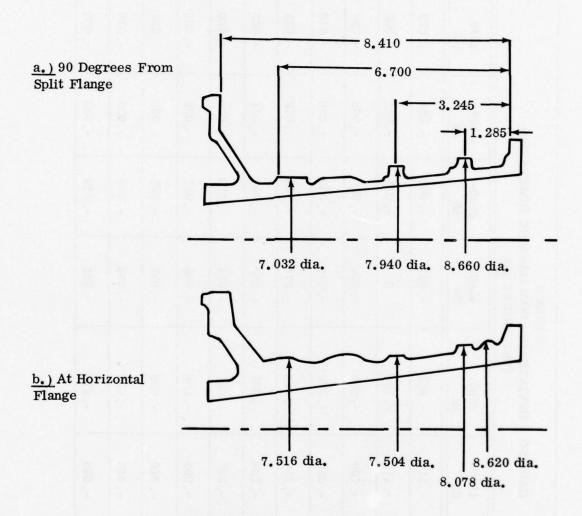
Casting Dimensions Measured During Preliminary Inspection
